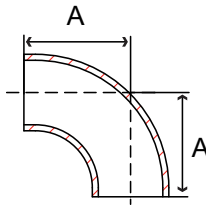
L2S4 & S77L2S6 – 90° Tube Bend (Long Radius)
